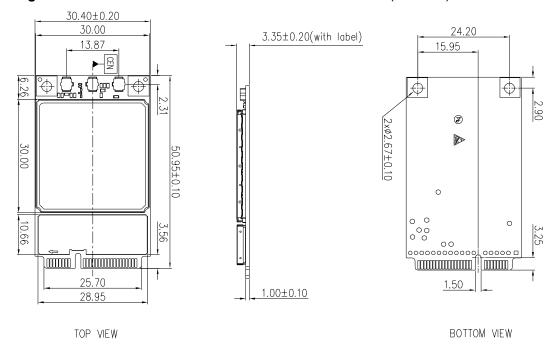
Dimensions of the ME909u-523 Mini PCIe module (unit: mm)
